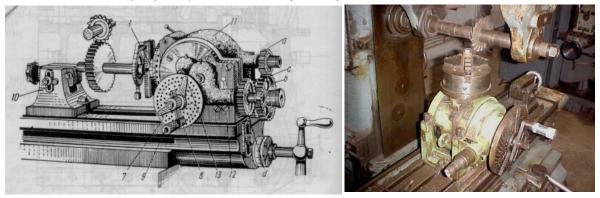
Mounting of job on the dividing head in milling machine.
